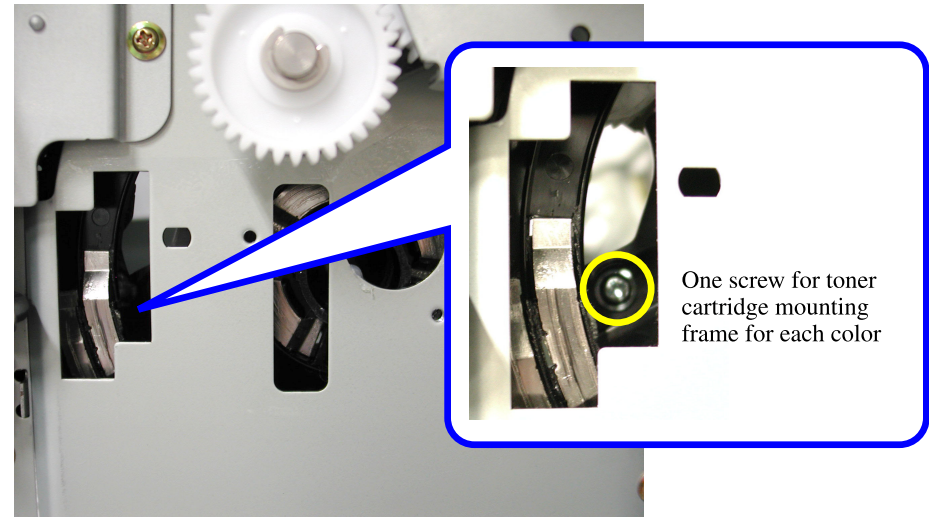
Removing the Screws securing the Toner Cartridge Mounting Frame
